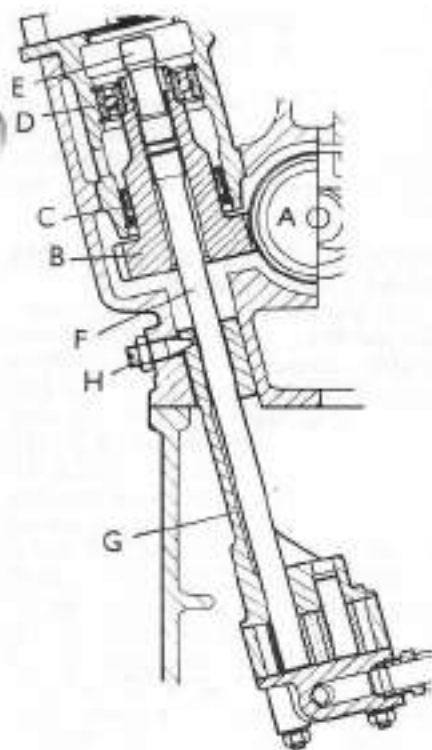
Cross-sectional view of 3-cylinder diesel injection pump drive. On late production, engine oil pump shaft (F) is counterbored at top end and fitted with thrust spring to hold fuel injection pump shaft (E) in proper position.
